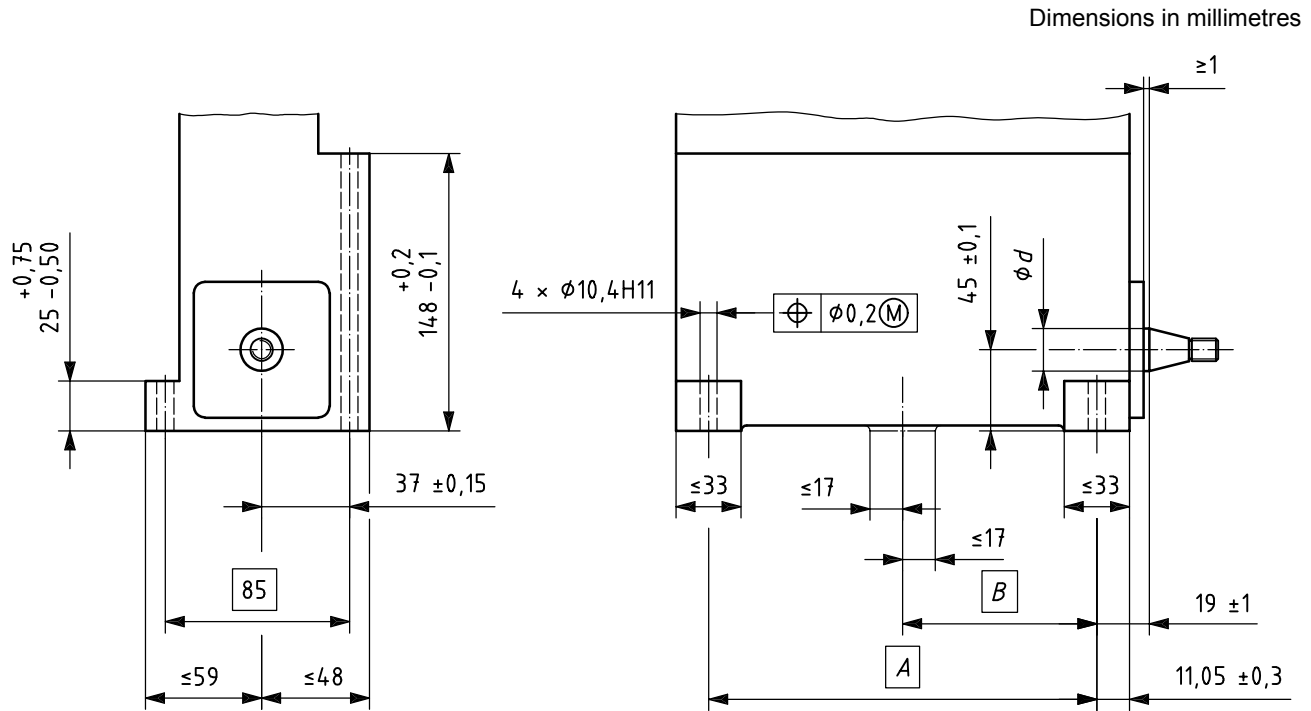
Base-mounted in-line fuel injection pump — Type 3
